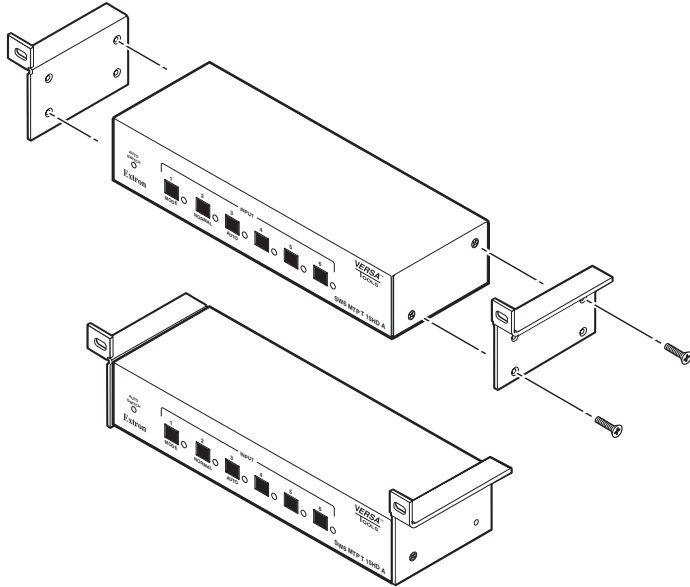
Mounting the SW MTP T on a 1U universal rack shelf
